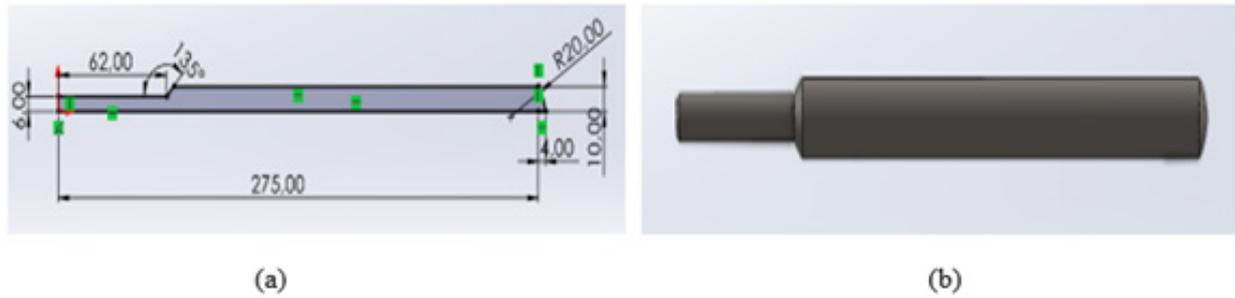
Tommy Bar (Part-7) design: (a) Dimensional 2D view, (b) 3D CAD model.
